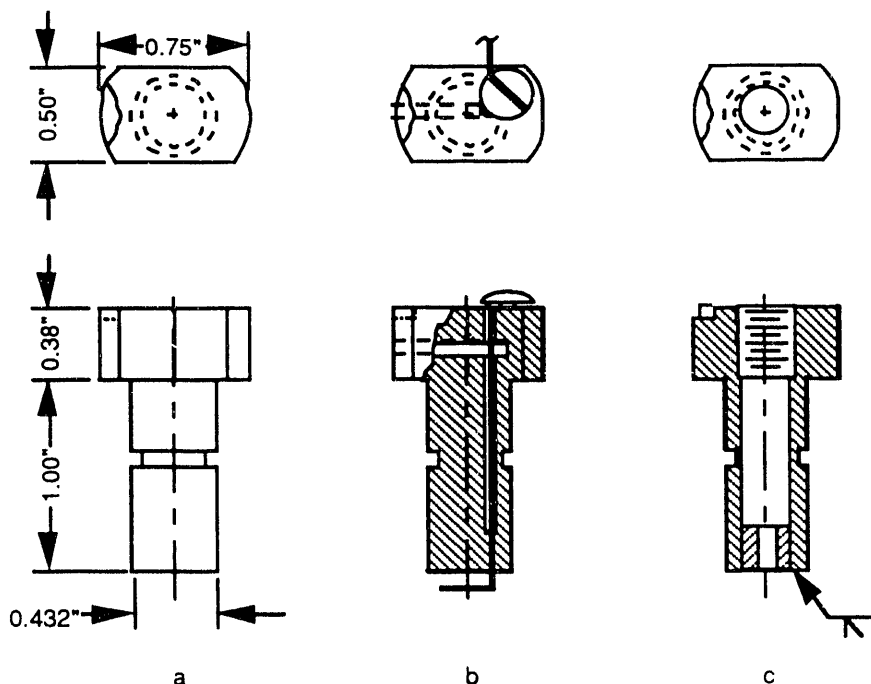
Fluid channel instrument port connections: (a) Blank, (b) Thermocouple using a 0.020" stainless steel sheathed type E thermocouple, (c) Tube connection, 1/16" NPT with a 1.59 mm through hole.
